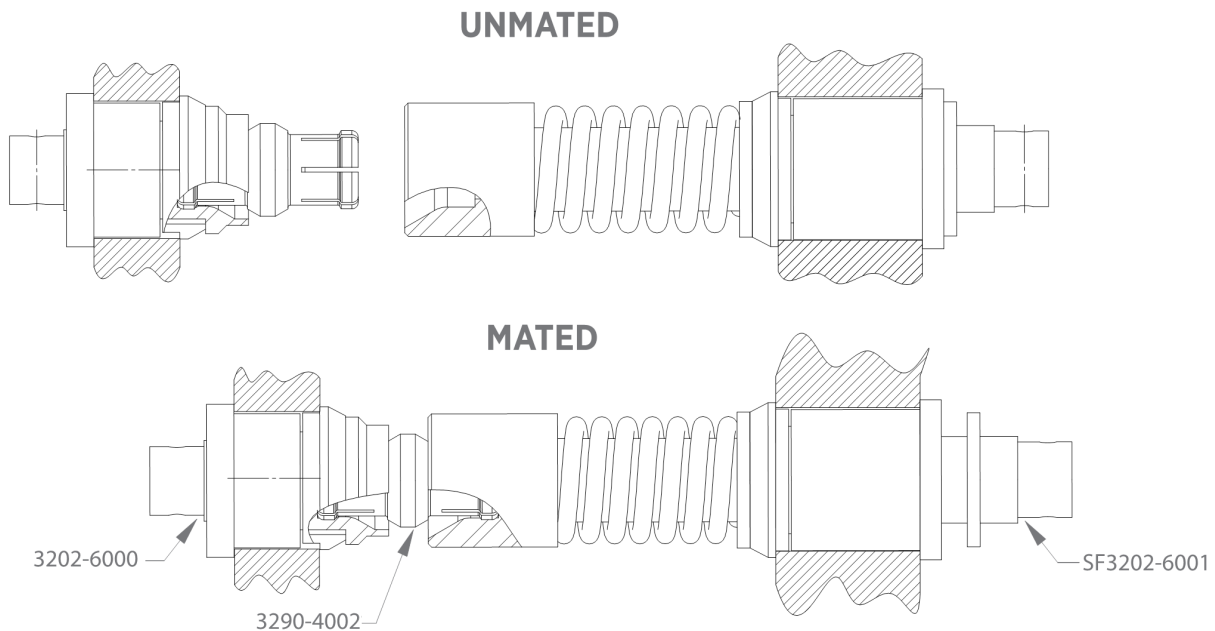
Snap-in Male Cable Connector and Snap-in Spring-Loaded Male Cable Connector and Bullet
